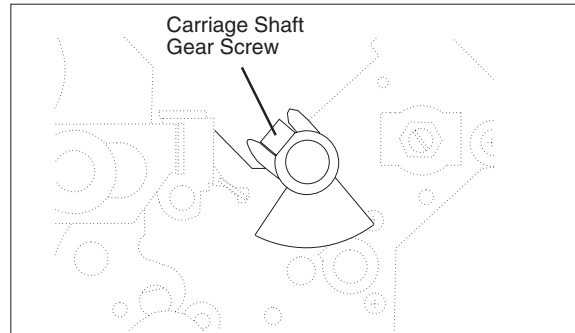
Carriage Shaft Gear Screw. (Viewed From Left Side)
